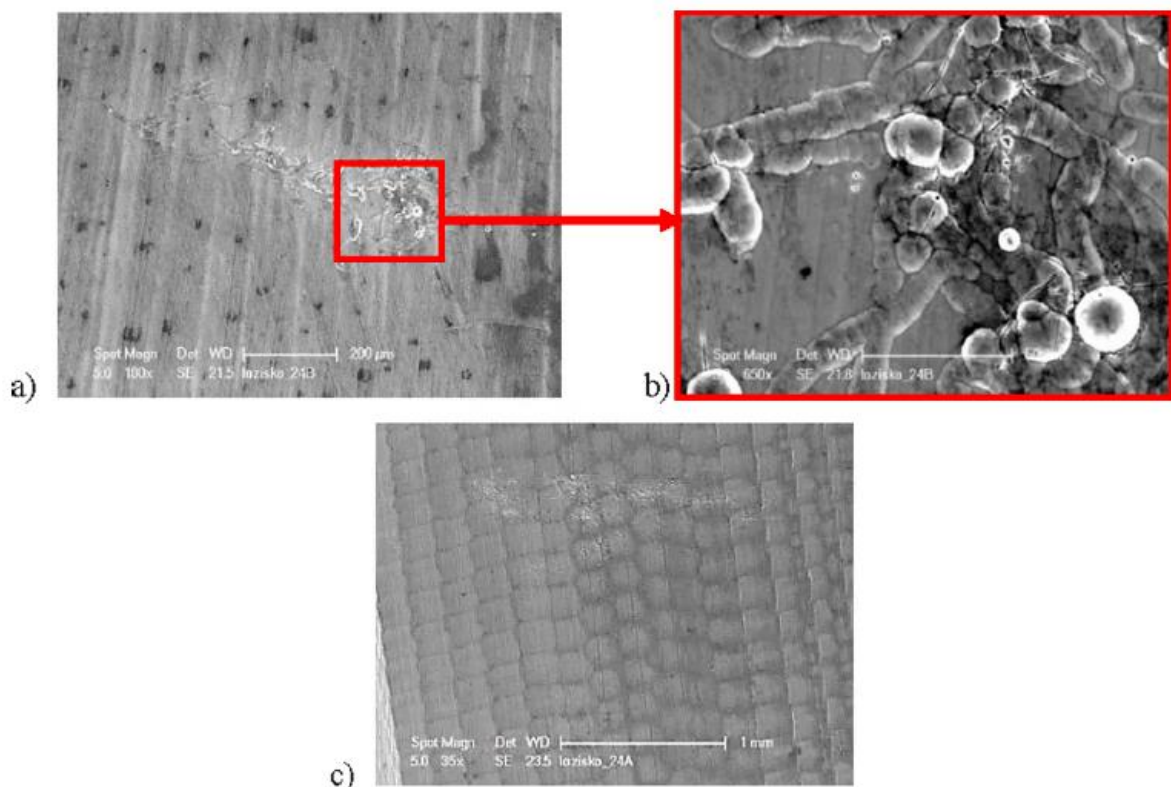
Surface defects on the lever num. 31; (a) area B; (b) detailed view on the defects in area B; (c) area A.
